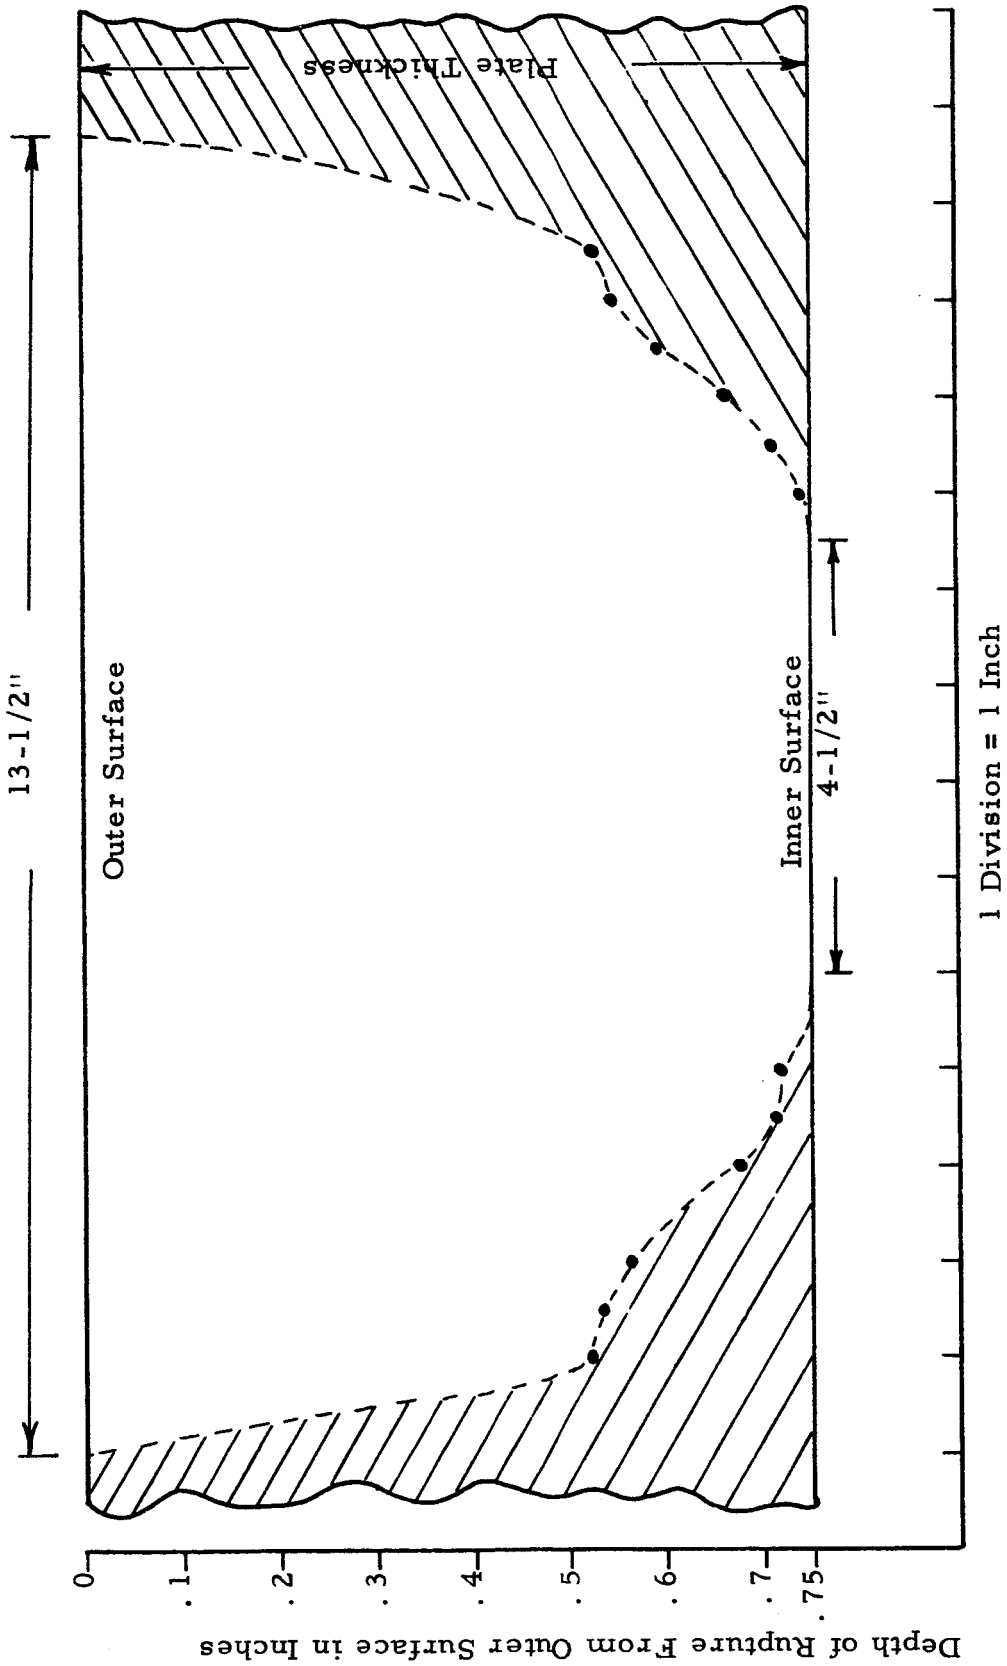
PROFILE OF RUPTURE PRODUCED BY HYDRAULICALLY BULGE TESTING THE SINGLE BUTT WELD PANEL NO. 41
